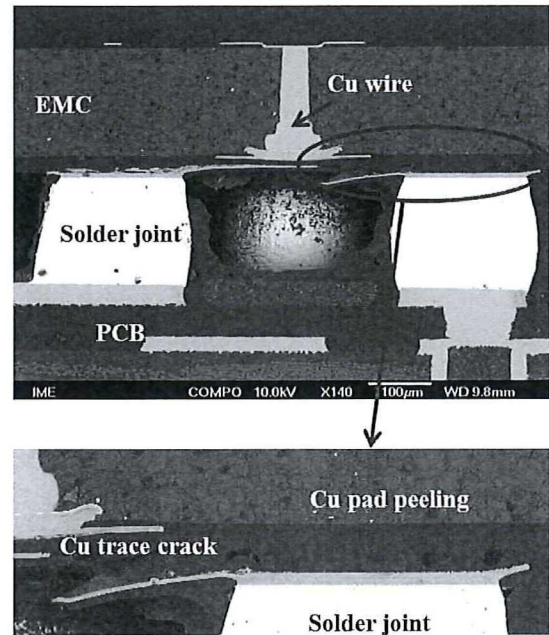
Failure mechanisms of the critical solder joint at the package corner of bottom RDL-first FOWLP with details of Cu pad peeling and Cu trace crack failures.
